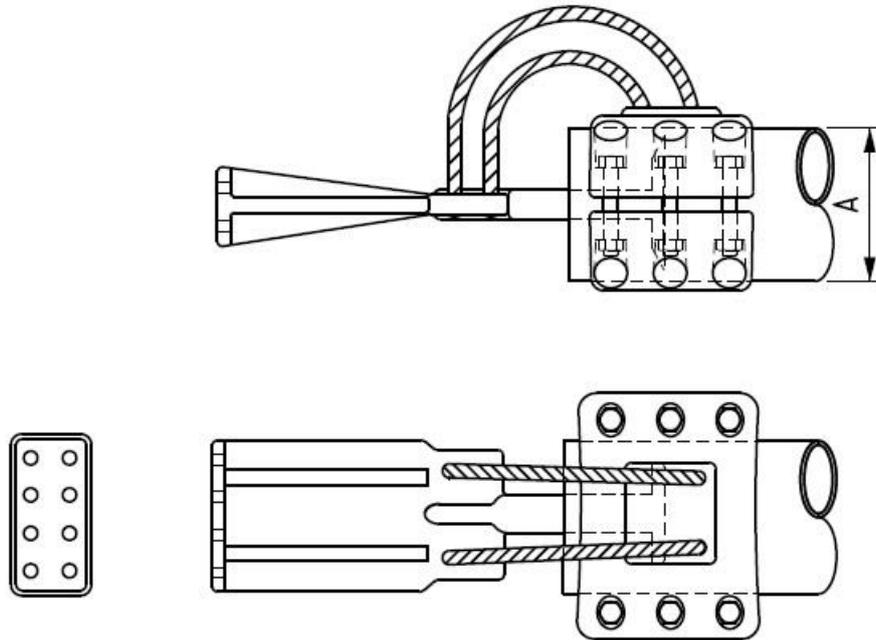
EEC-I-8HV-S: Expansion Clamp – Inline – 8-Hole Vertical Pad – Equipment Mounted – Slide
